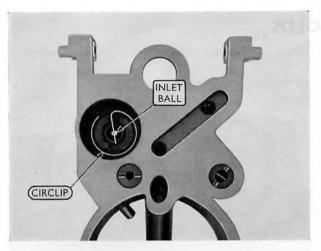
Pump piston removed from emulsion block to show location of pump inlet ball and circlip
